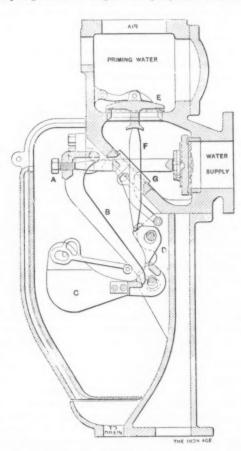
The Evans Dry Pipe Valve Set with Air on the System.
